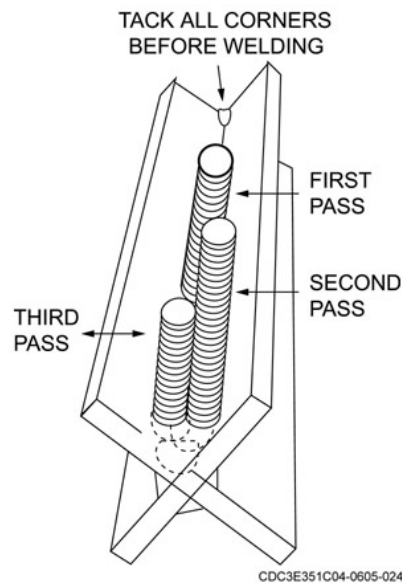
Multiple welding bead passes (flat position).
